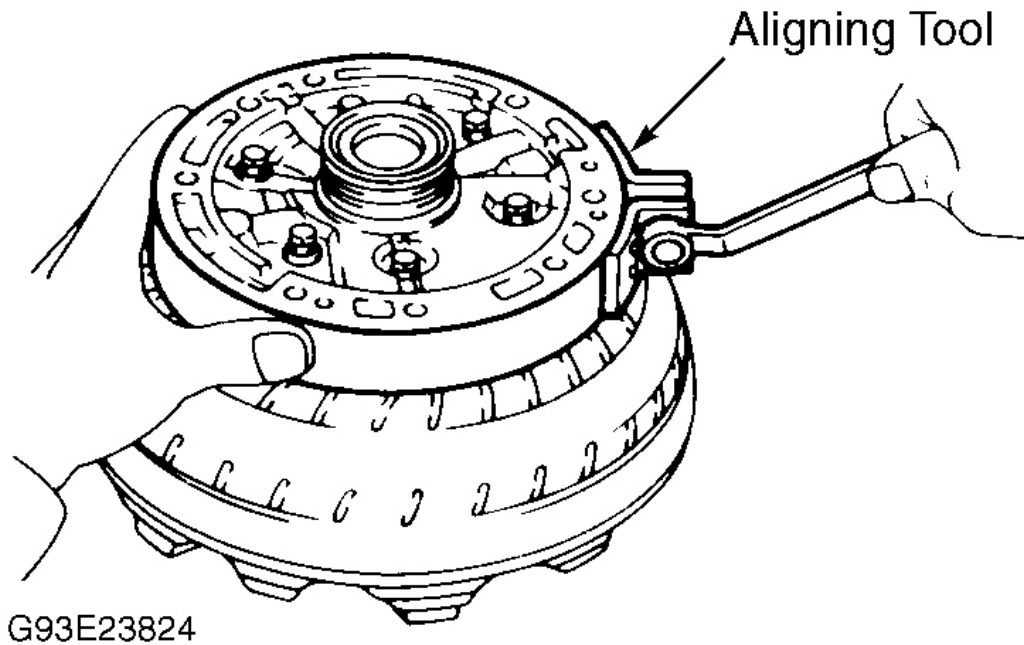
Aligning Oil Pump Housing & Stator Shaft
